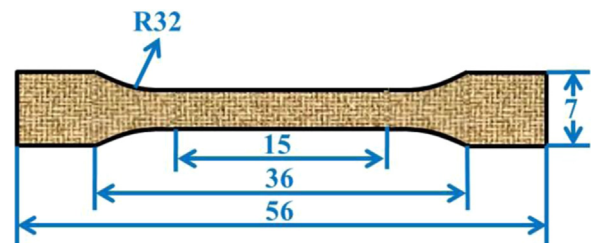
Specimen dimensions of tensile test (all dimensions in millimeters).
